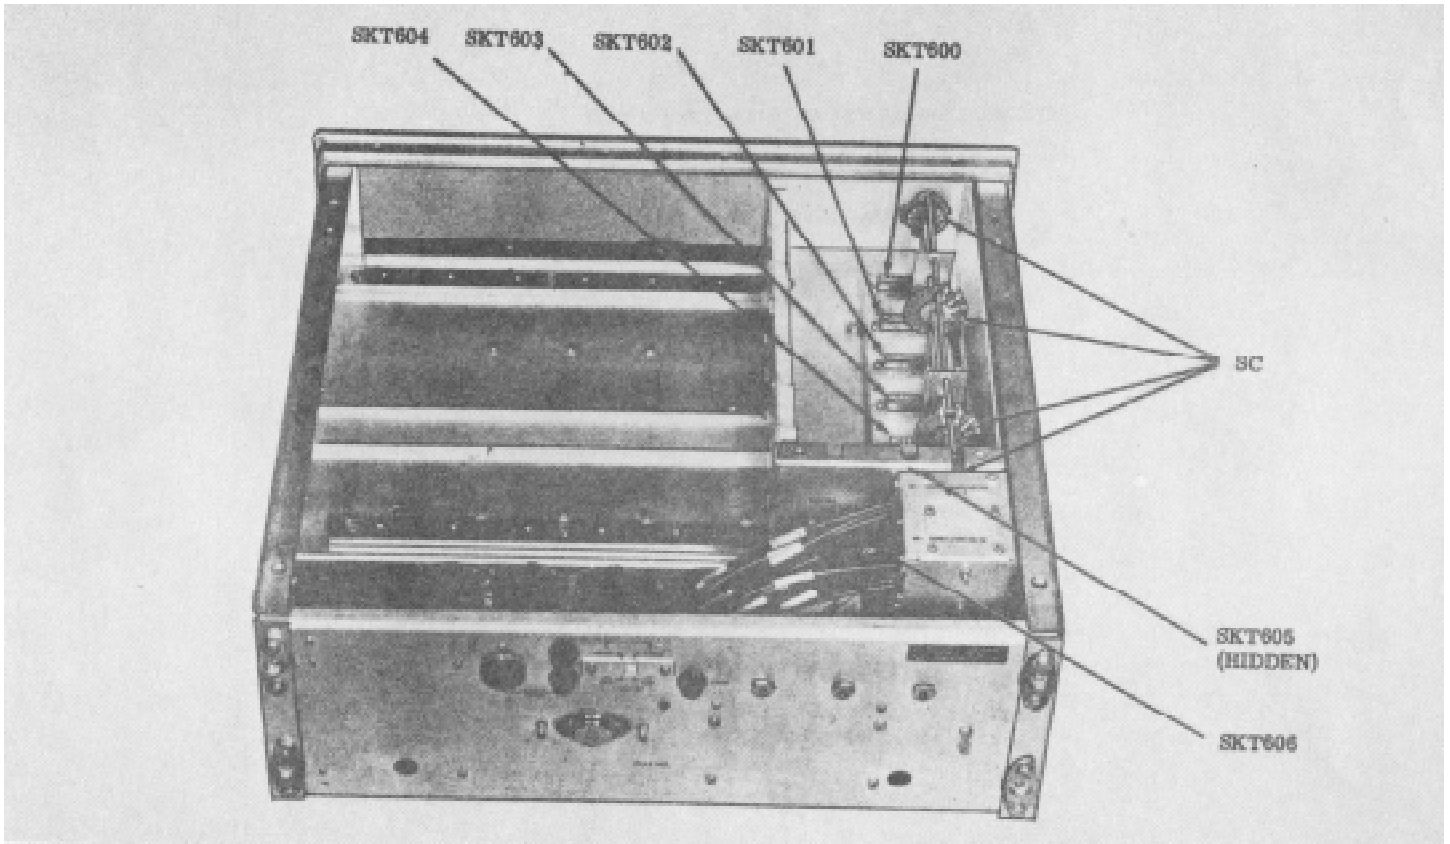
NOISE RECEIVER TF2092, BOTTOM REAR VIEW, SHOWING OSCILLATOR UNIT TM7775
